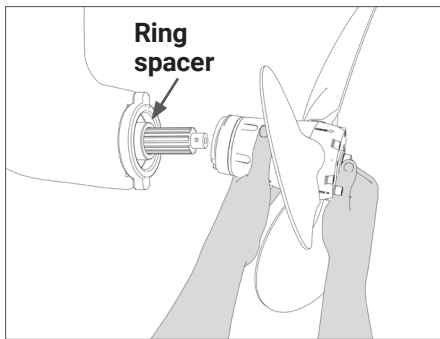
| How to insert the propeller on the Sail-Drive shaft
